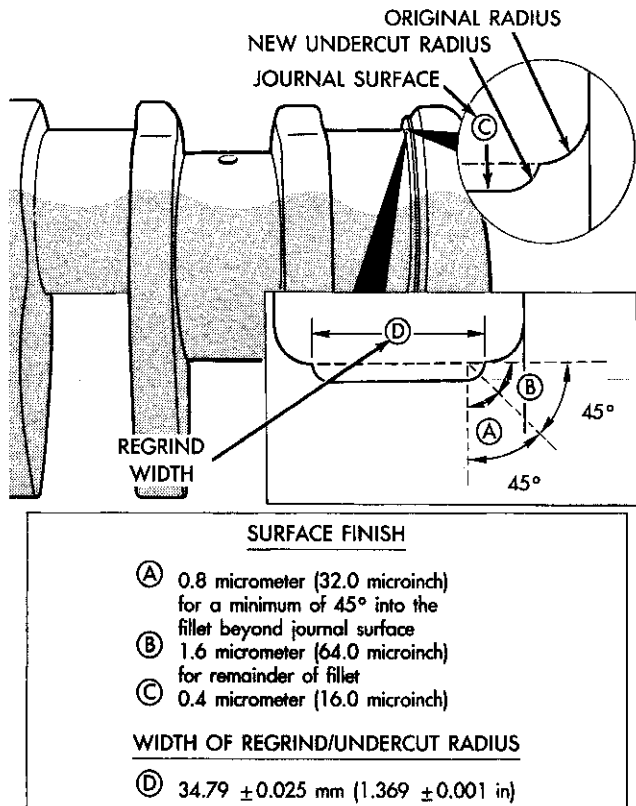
Crankshaft Rod Journal Grind—Preferred Method
